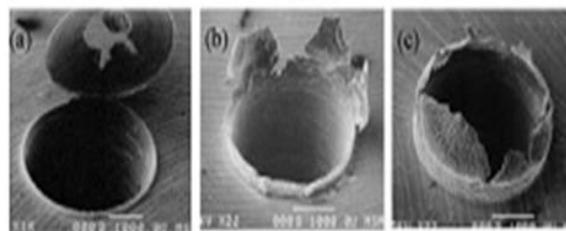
Types of Drilling Burr (a) Uniform (b) Crown (c) Transient
